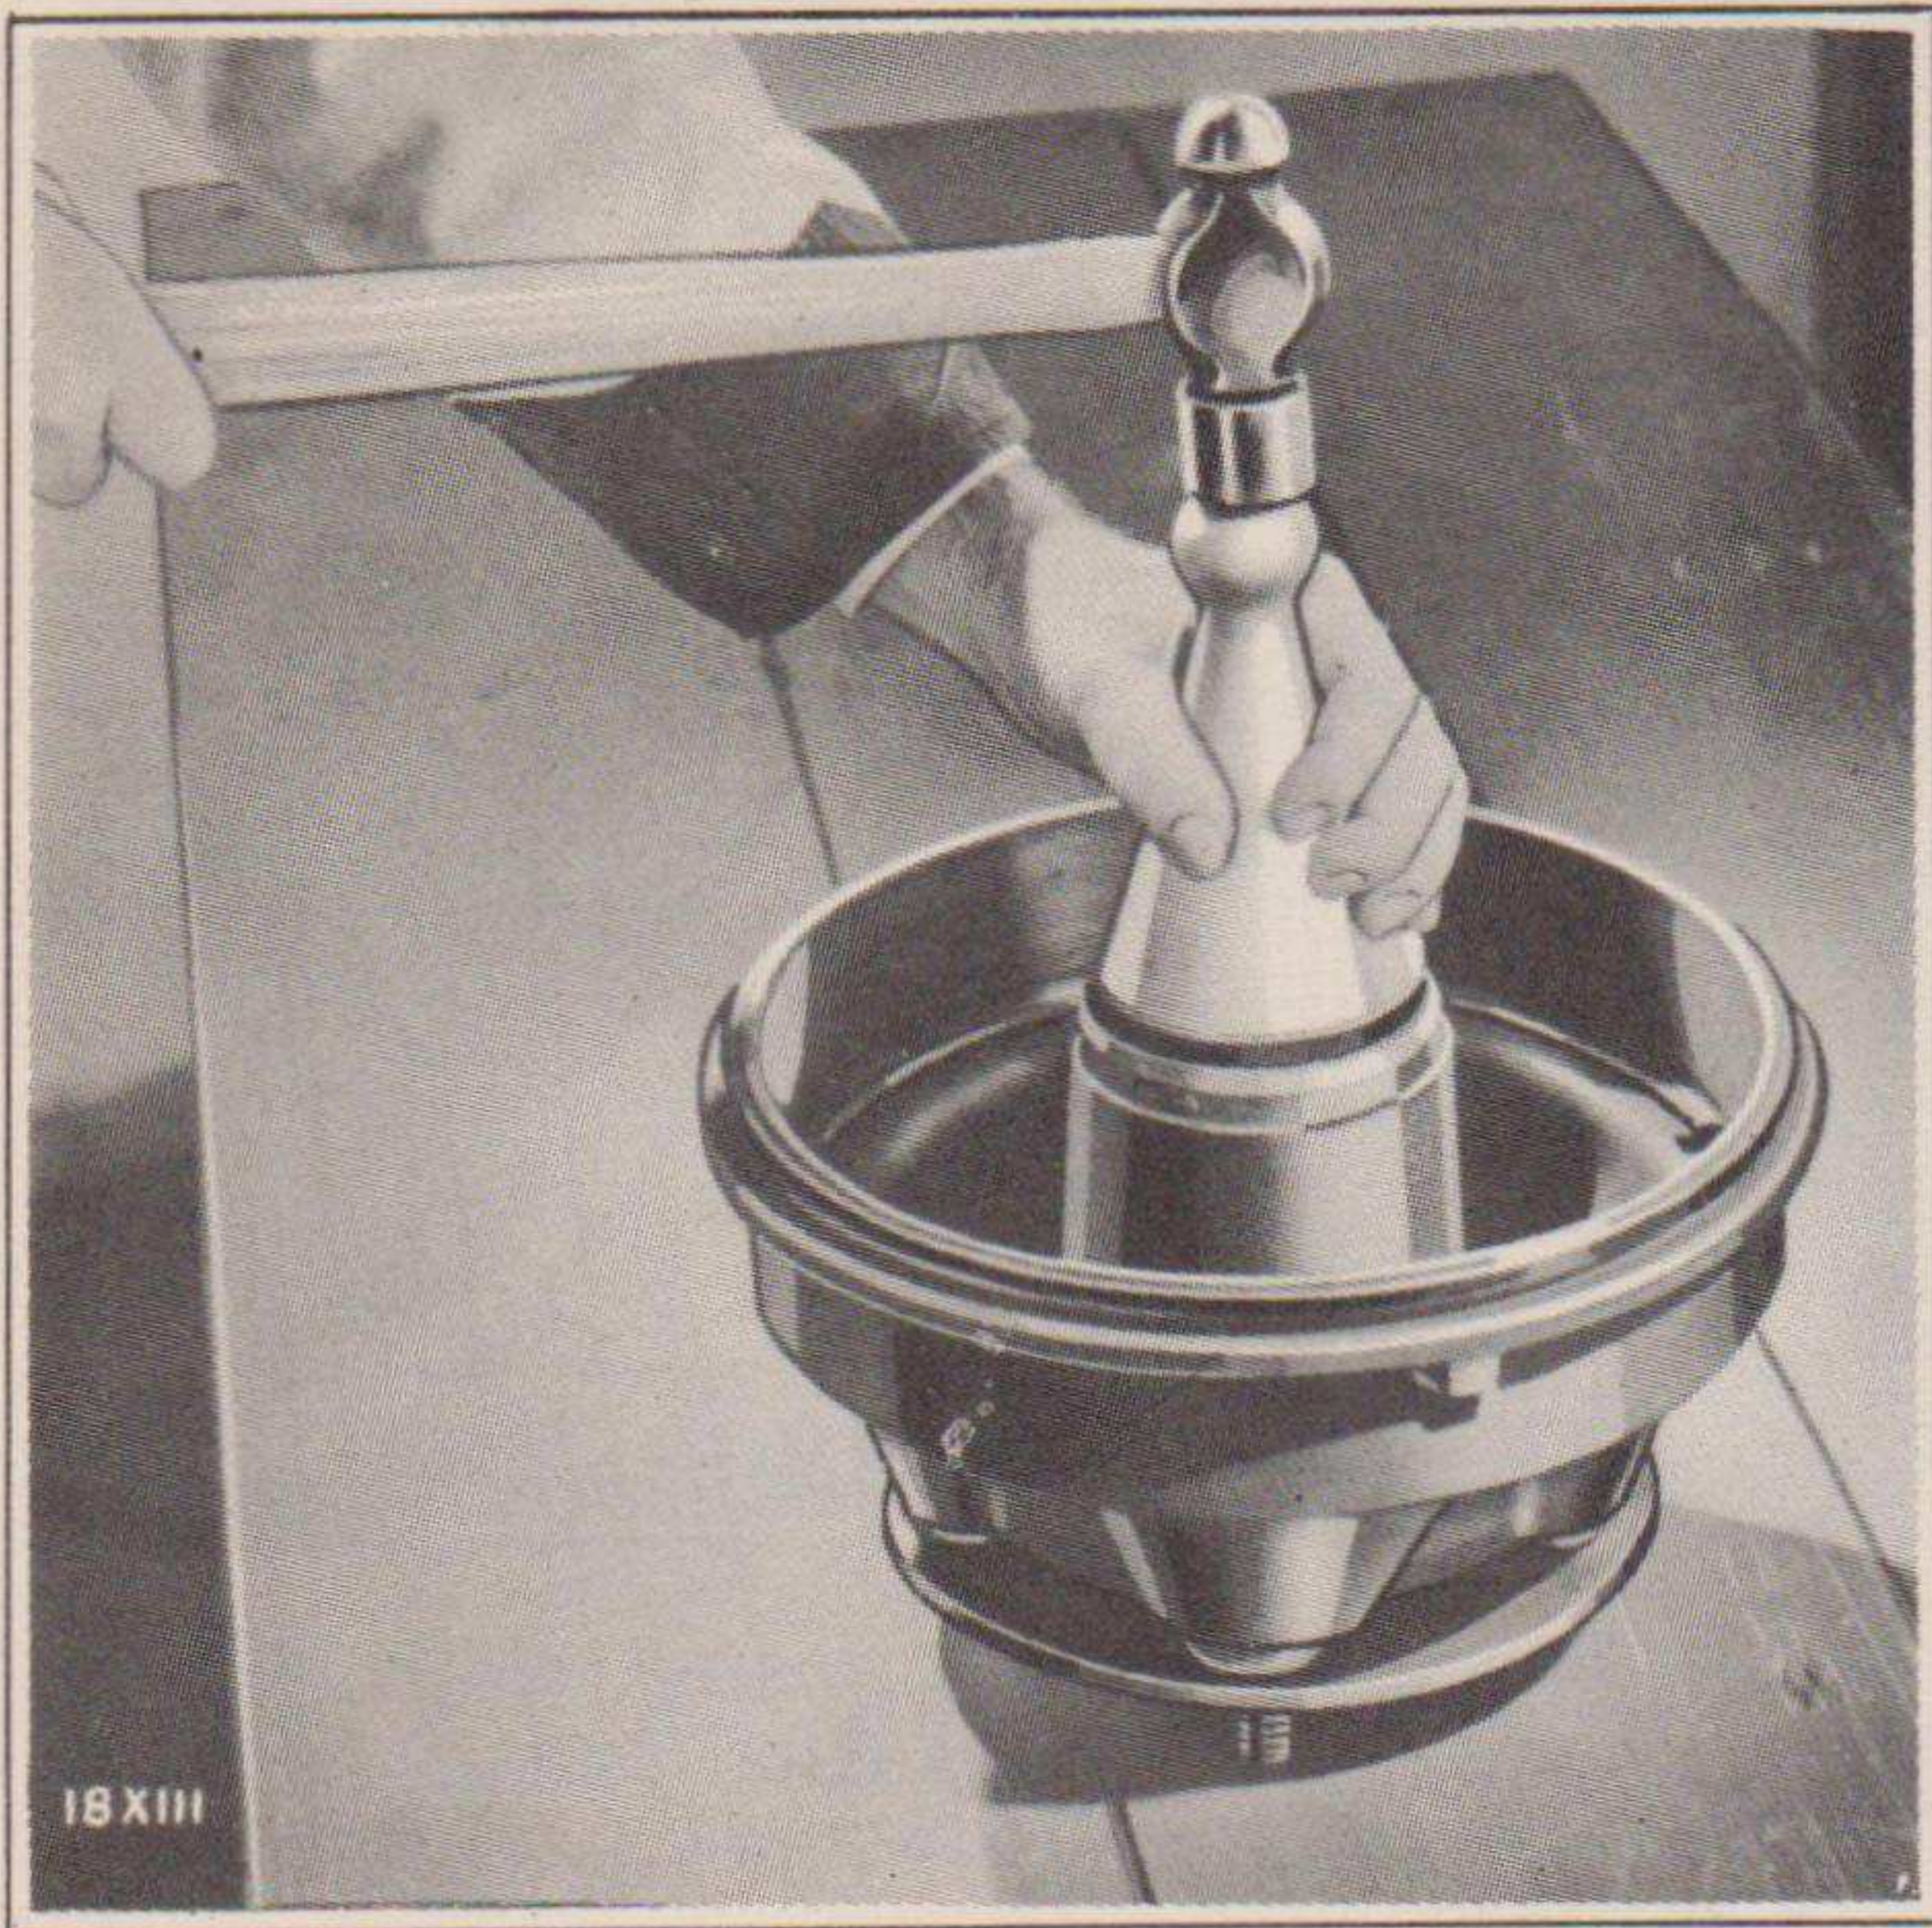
Installing Wheel Bearing Oil Seal (Tool DD-808)
